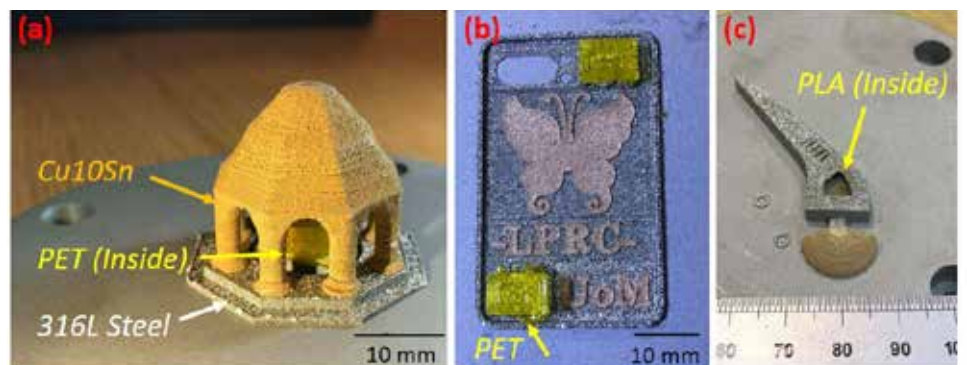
3D-printed components: (a) pavilion, (b) mobile phone case and (c) hip implant.
